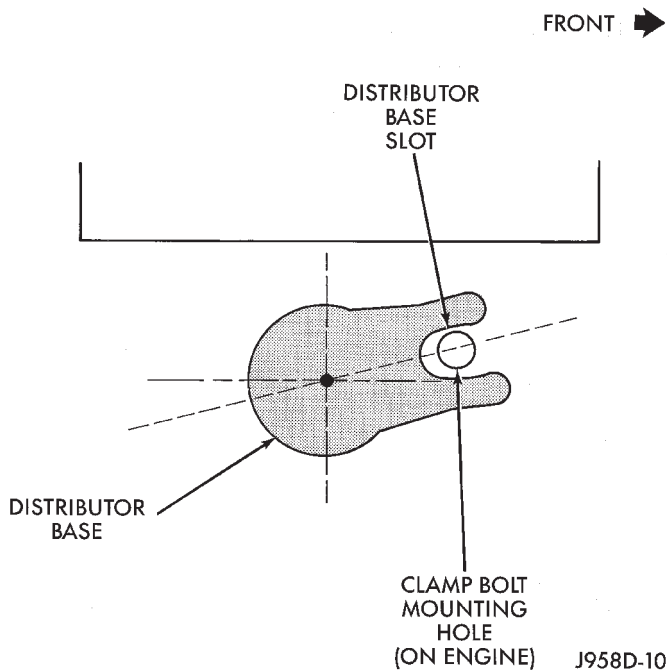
Distributor Engaged Position—4.0L 6-Cylinder Engine
